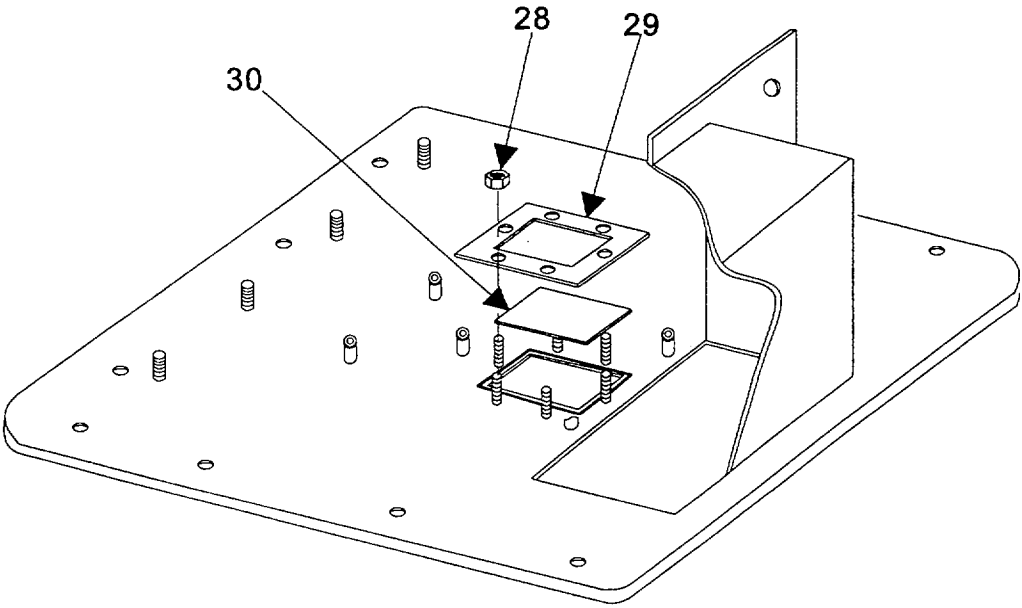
Panel Assembly (Sheet 4 of 7).
